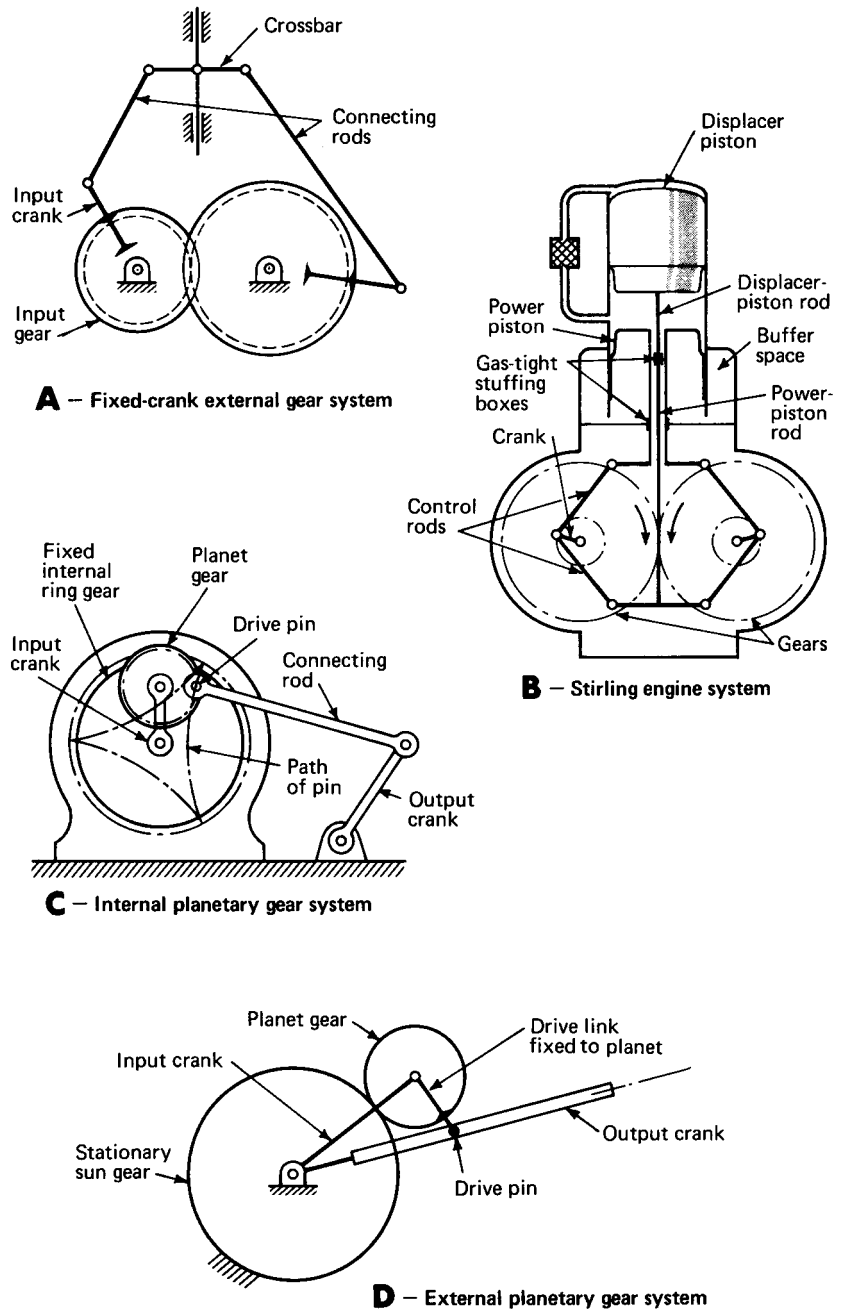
Five-bar mechanism designs can be based on paired external gears or planetary gears. They convert simple input motions into complex outputs.
